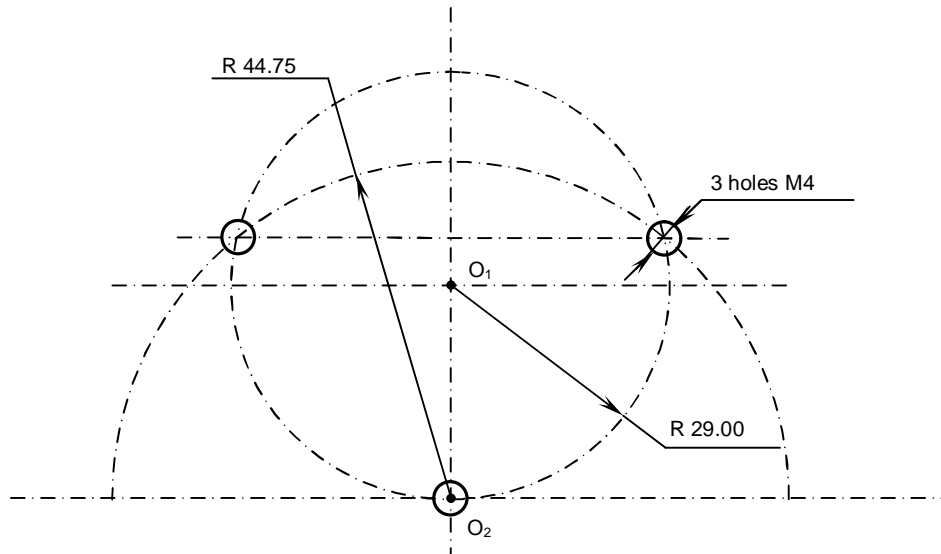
The Mounting Dimensions of the HHPS NC110-78B Stand
